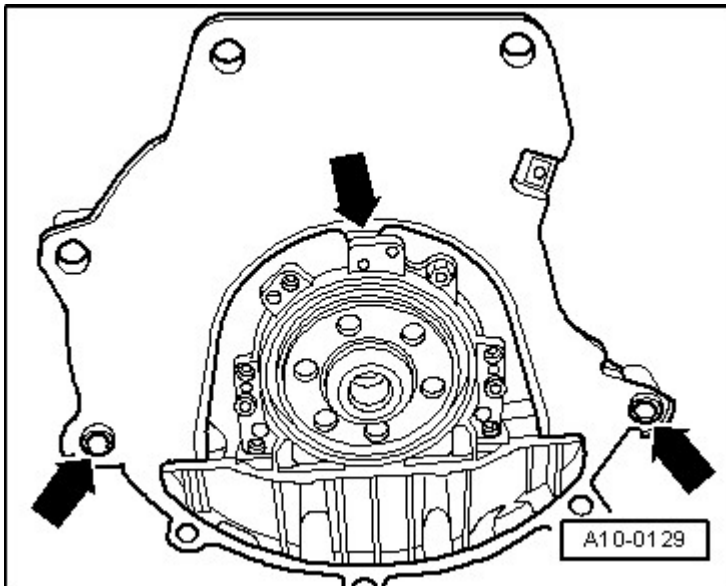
Identifying Intermediate Plate Alignment Bushings
